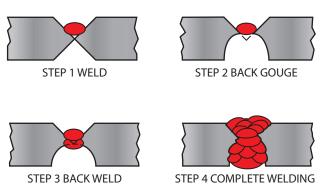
Using back gouging to ensure a sound weld root.
